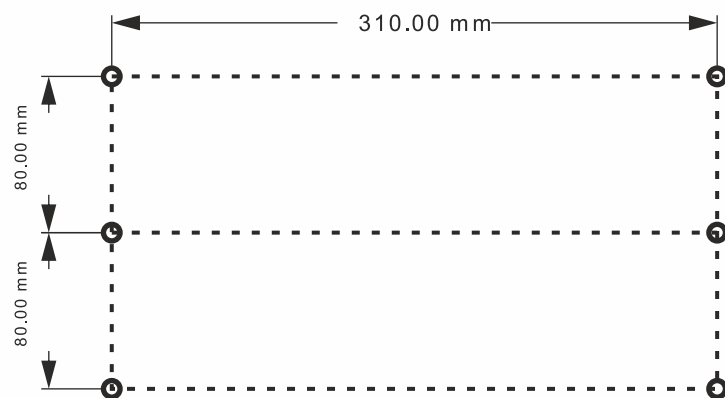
Drilling drawing for KLPHYB/KLPGT
